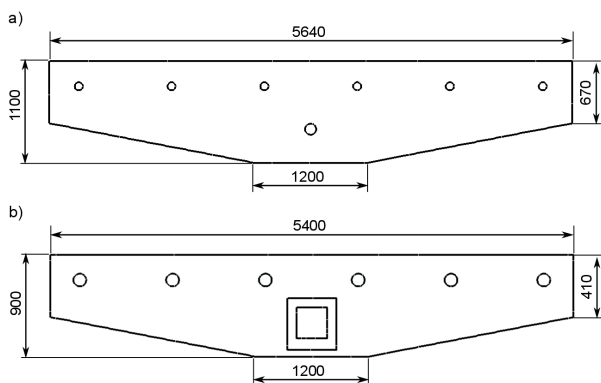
Dimensions of investigated tundish: top view (a) and bottom view (b)
